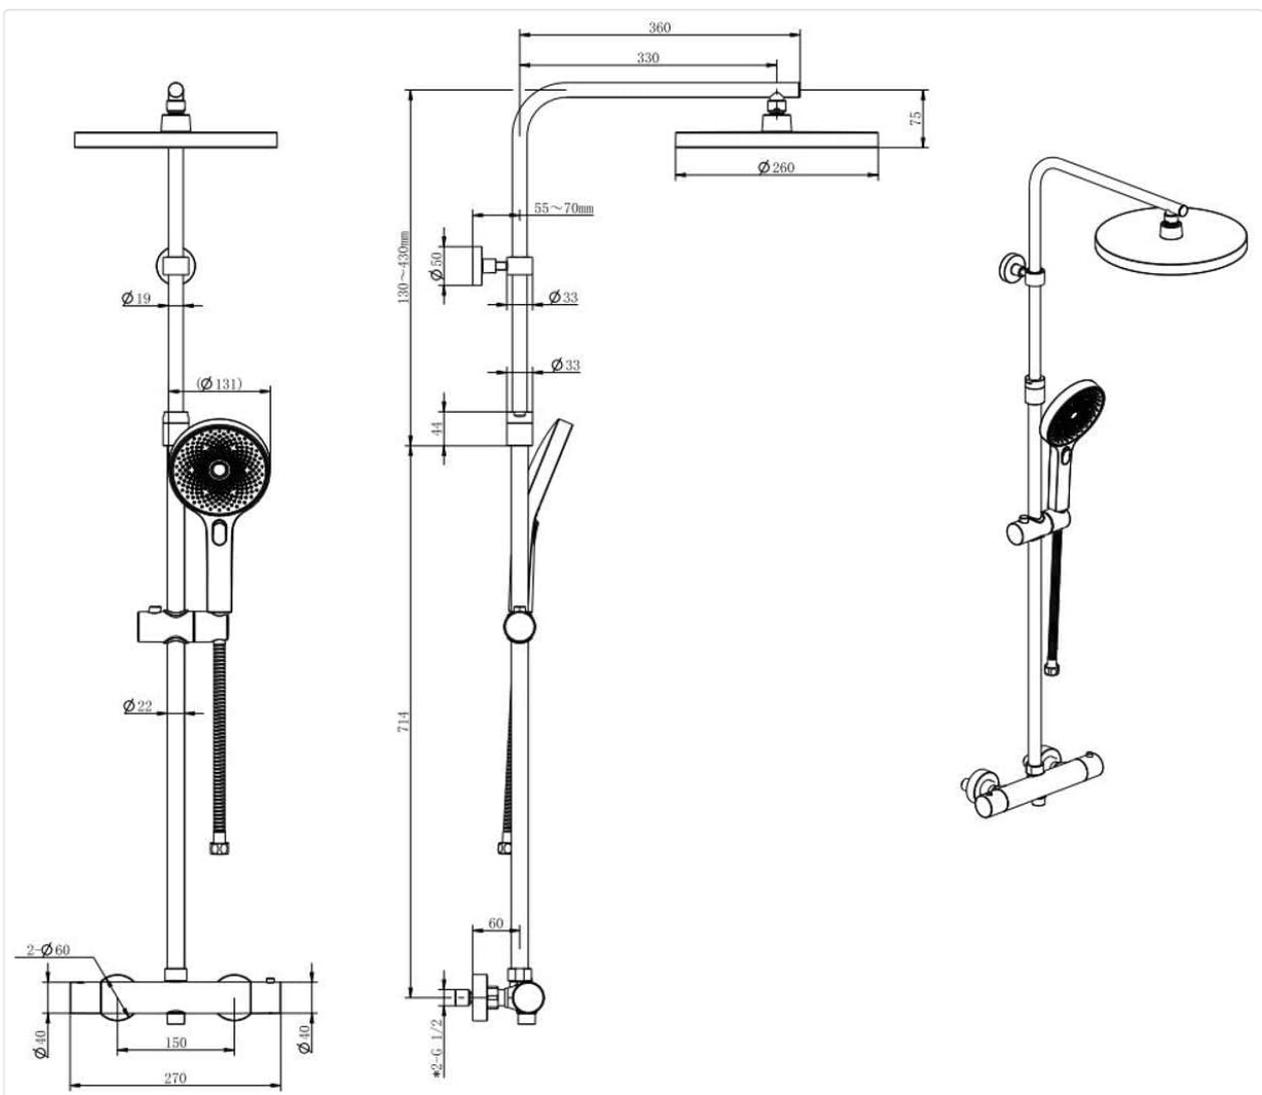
Technical drawing illustrating the dimensions and components of the kielle Oudee shower set.
